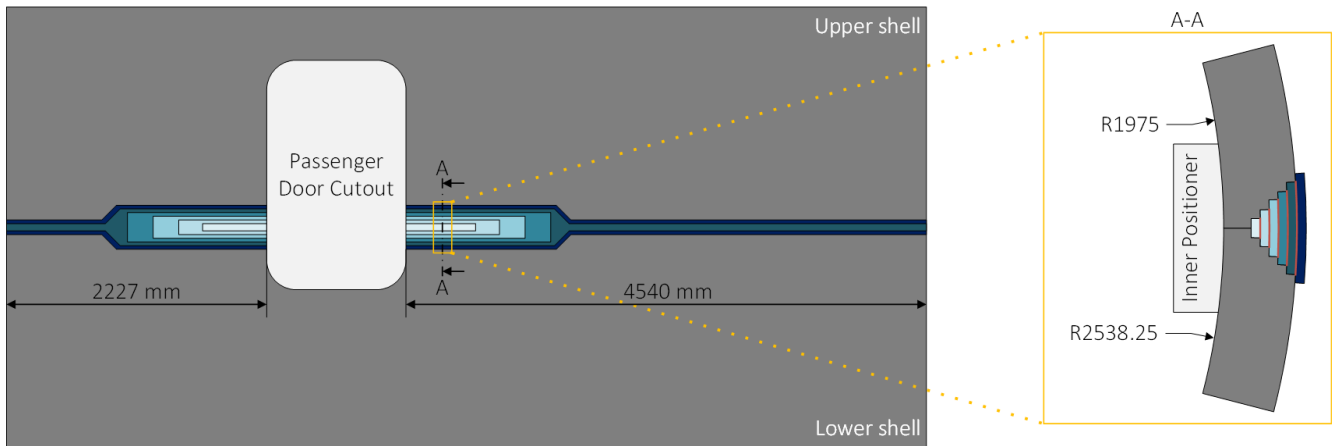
Geometry of the longitudinal butt joint and dimensions of the laminate straps
